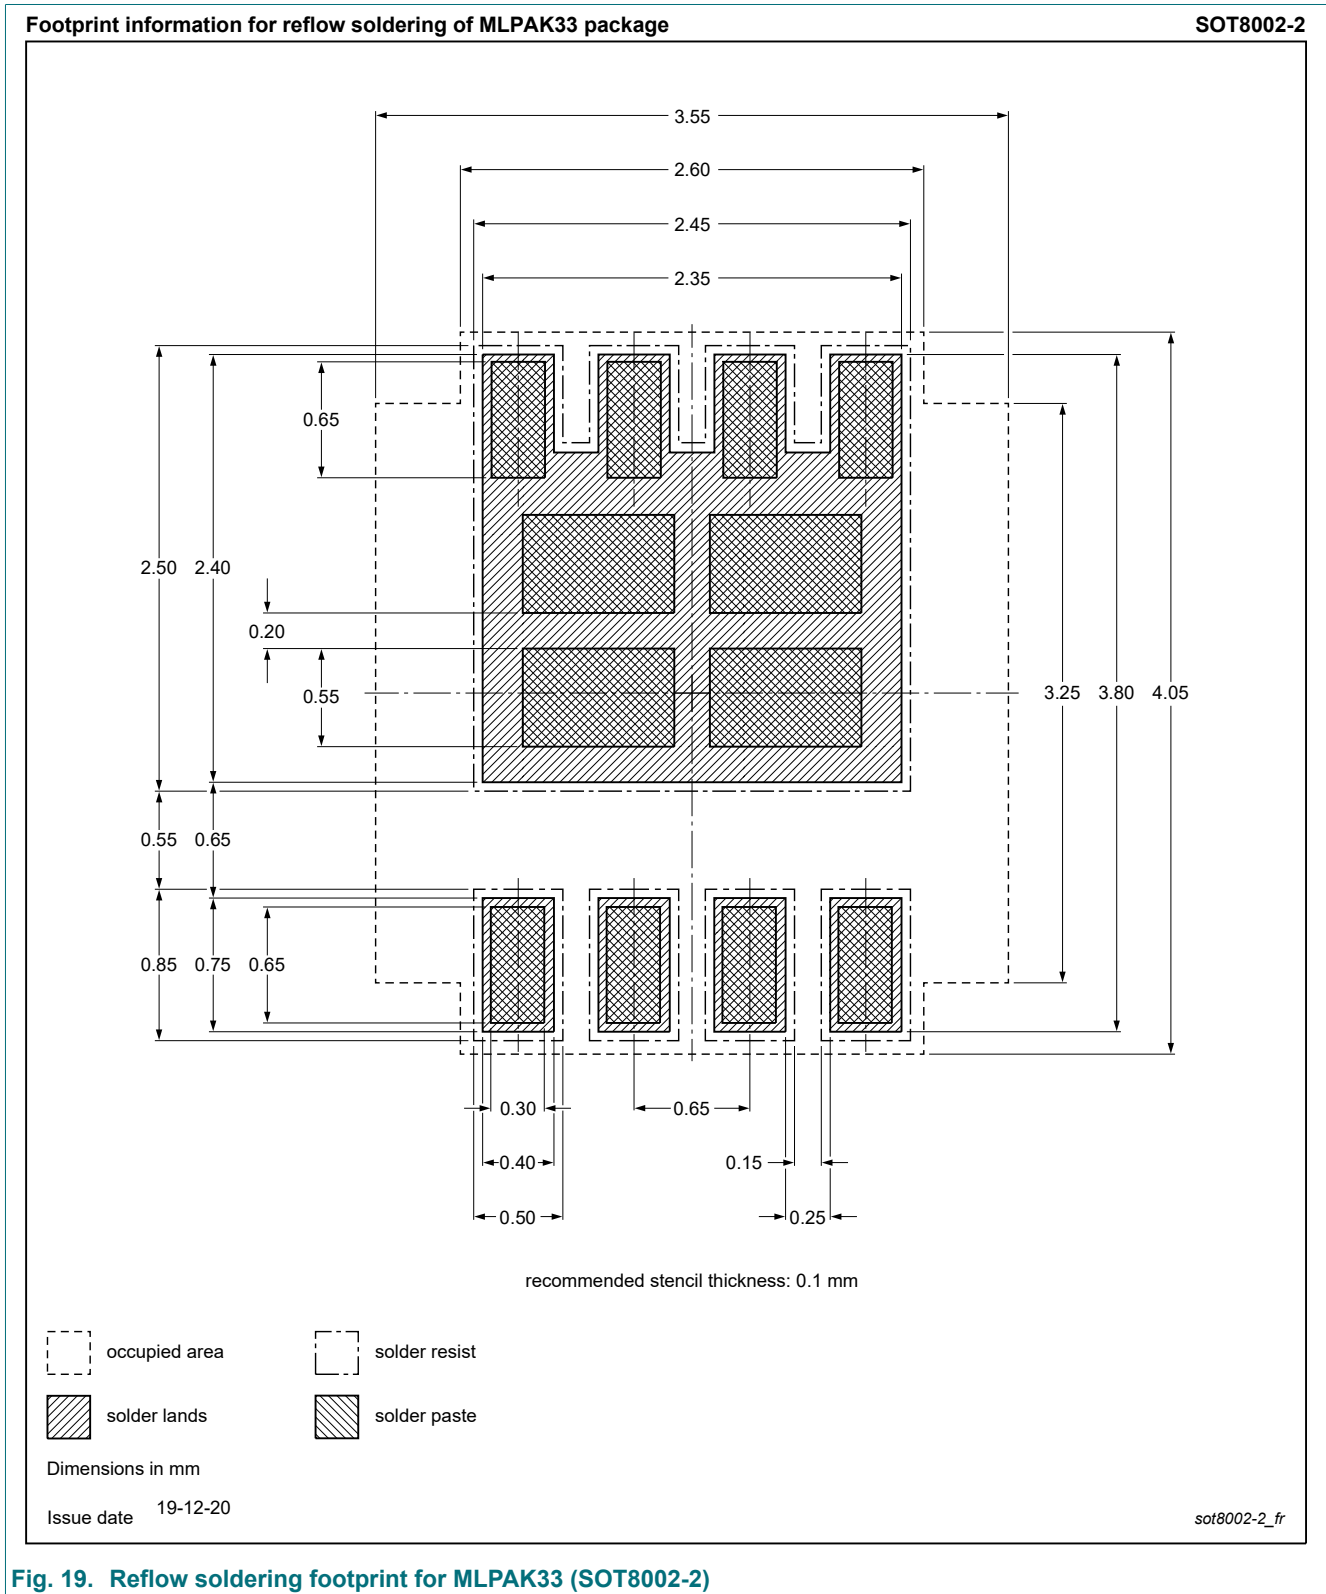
Reflow soldering footprint for MLPAK33 (SOT8002-2)
